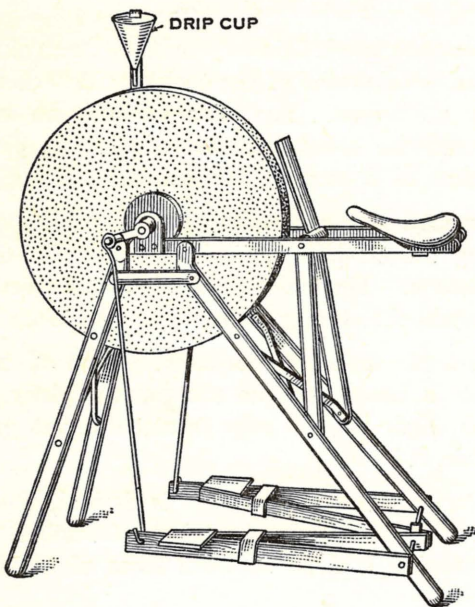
(b)—A grindstone is excellent for sharpening kitchen knives and other wedge-edge tools
